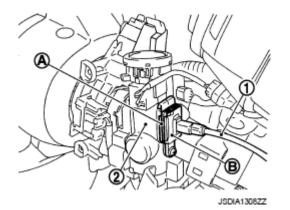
Identifying Lock Plate Of Holder Courtesy of NISSAN MOTOR CO., U.S.A.
